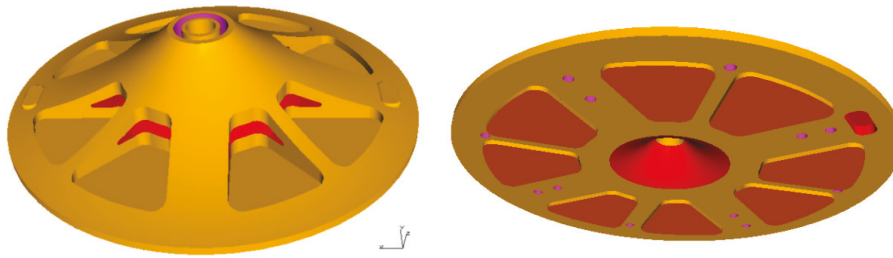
Exemplary resilient grinding wheel designed to the requirements of 3D printing process [3]
